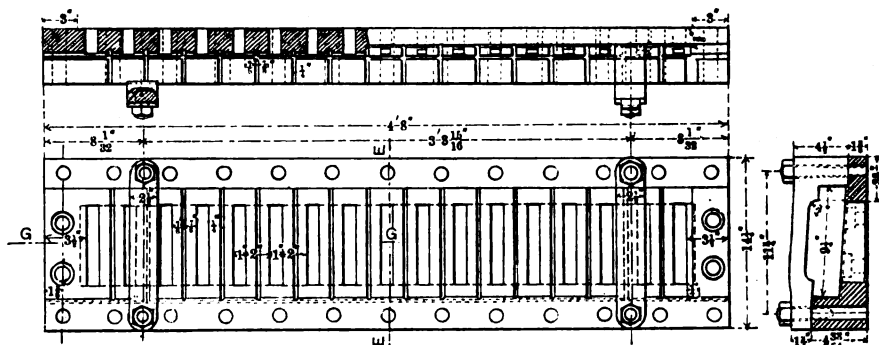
Low-Pressure Inlet-Valve Seat.
